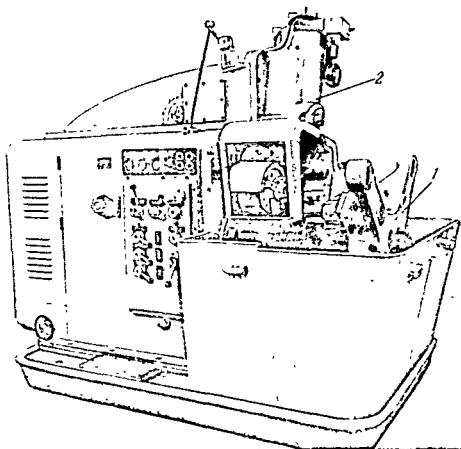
Single-spindle semiautomatic chucking machine, model 1425
